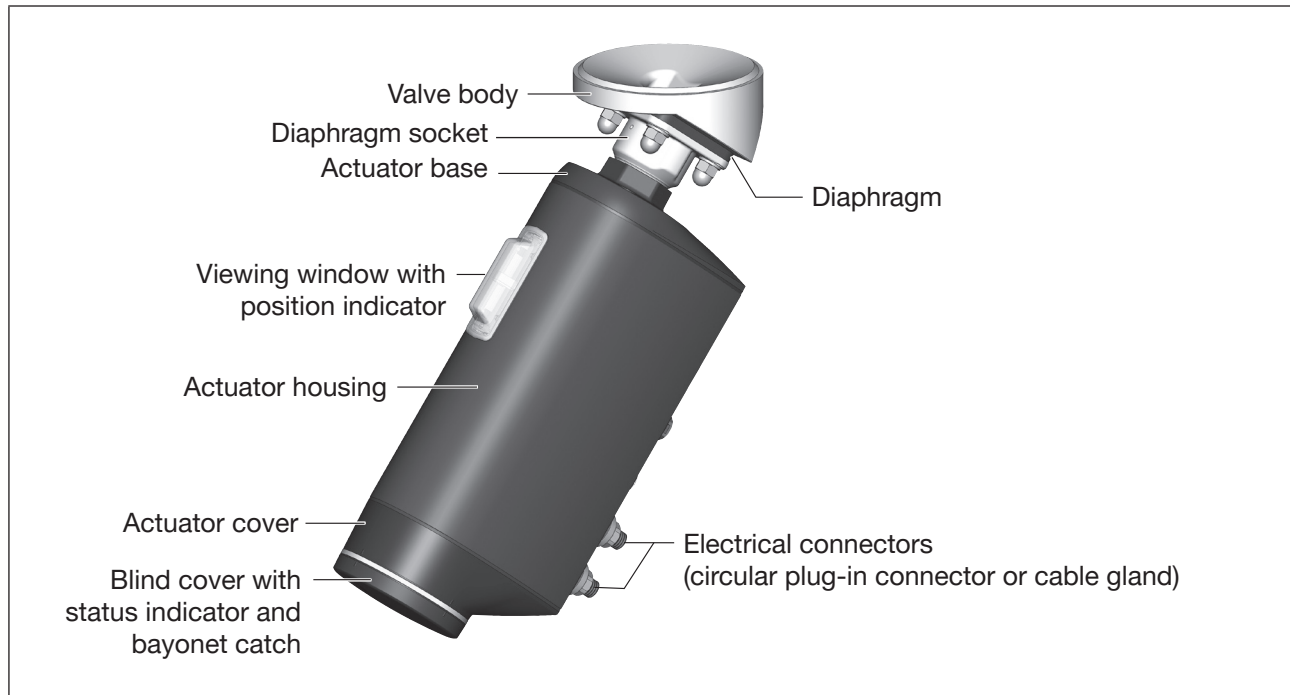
Structure, electromotive diaphragm valve with tank body bottom, Type 3325
